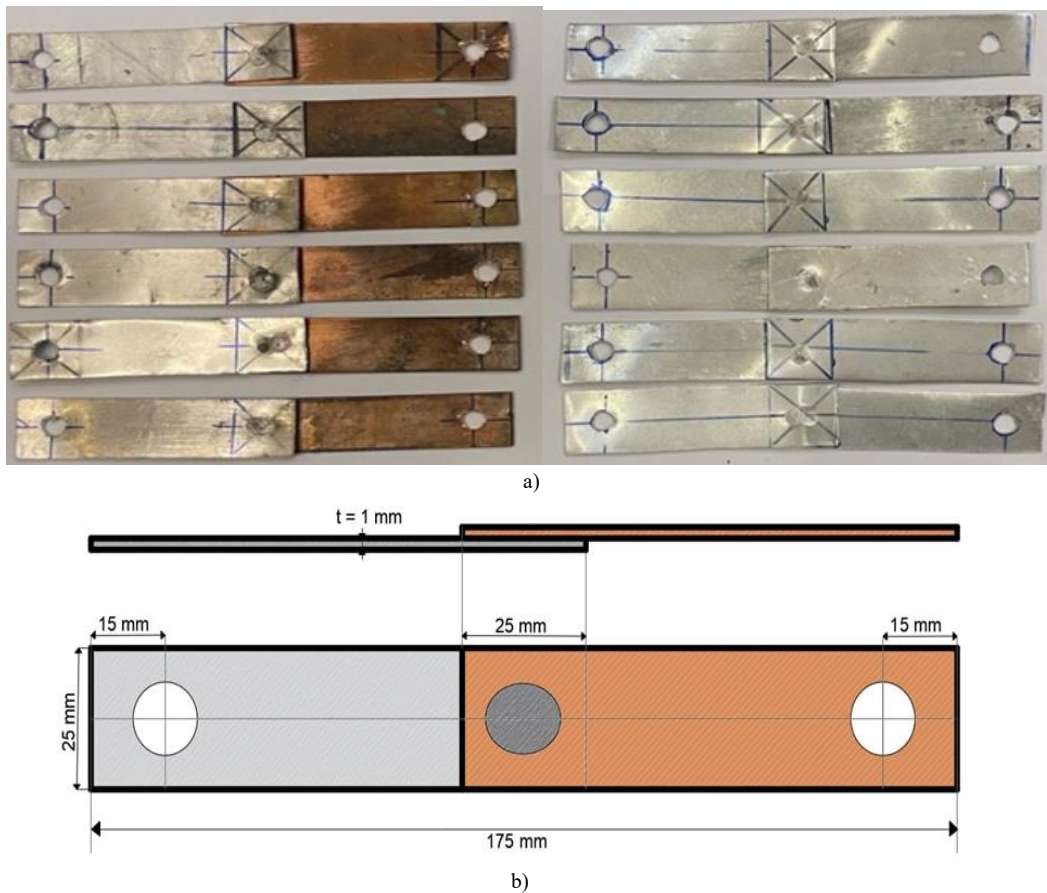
a) RSW specimens b) RSW specimen dimensions for fatigue test
